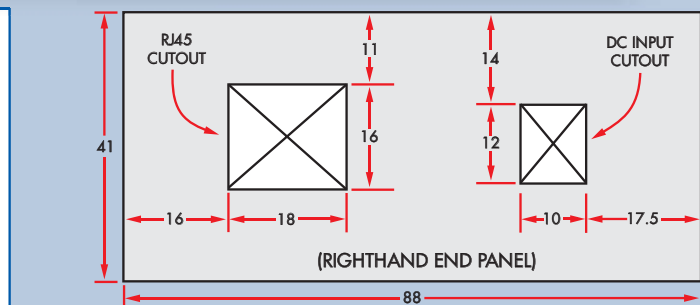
here's how to make the cutouts in the righthand end panel for the RJ45 socket and the DC power socket.
